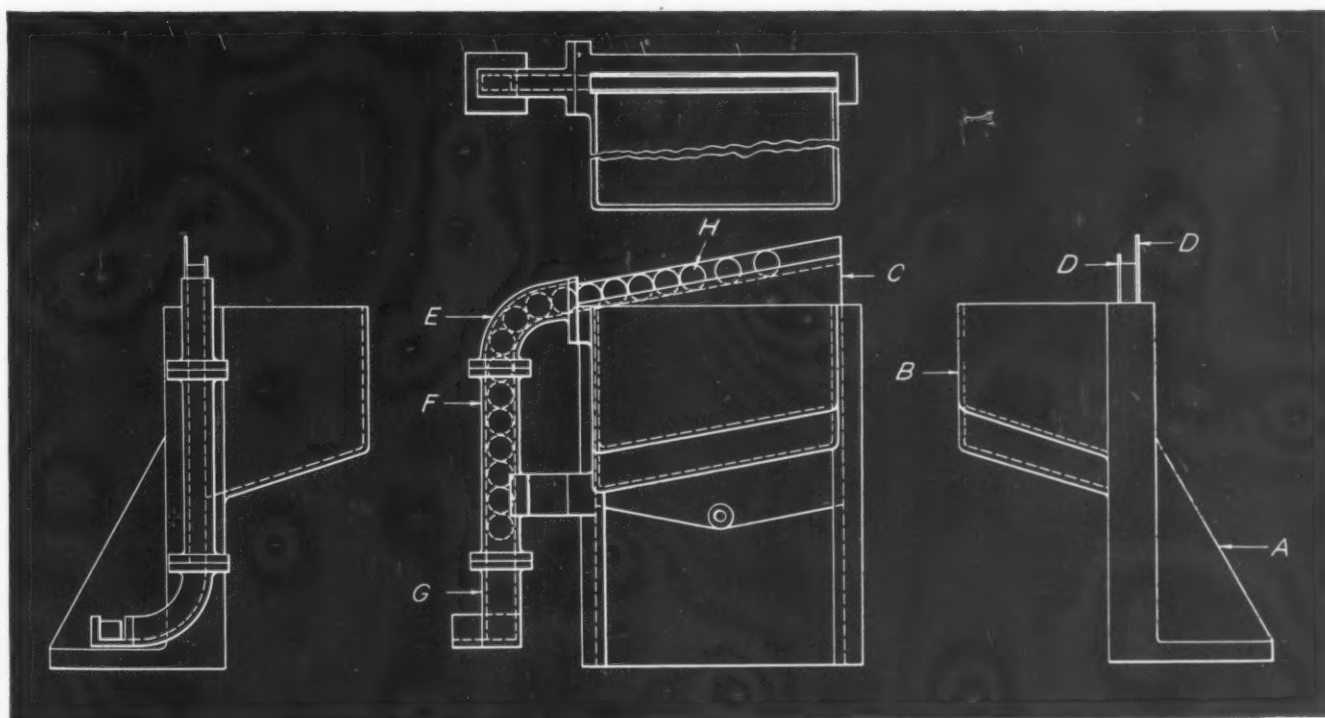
Hopper Feed with Reciprocating Slide *C* Arranged for Handling Cylindrical Parts
